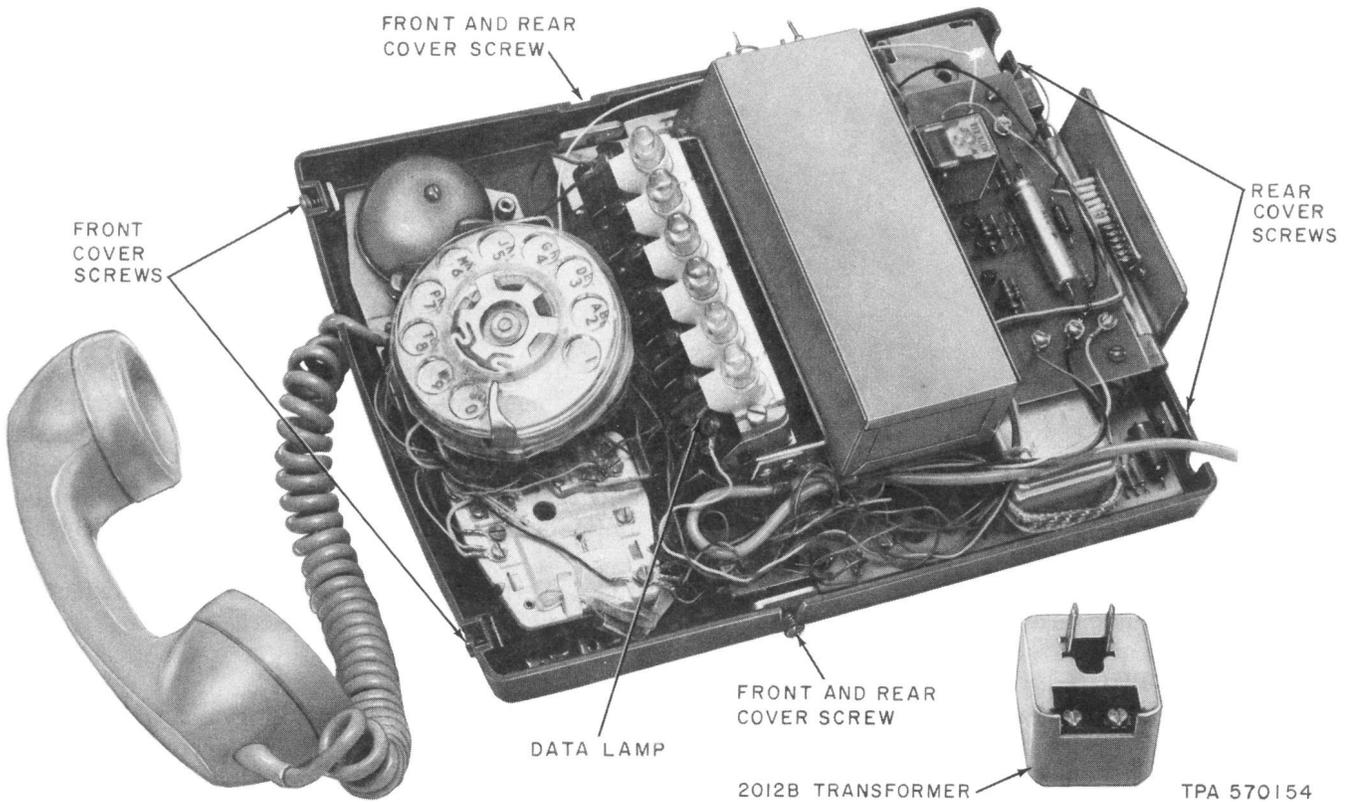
Data Set 113A-L1/2, Front and Rear Covers Removed
